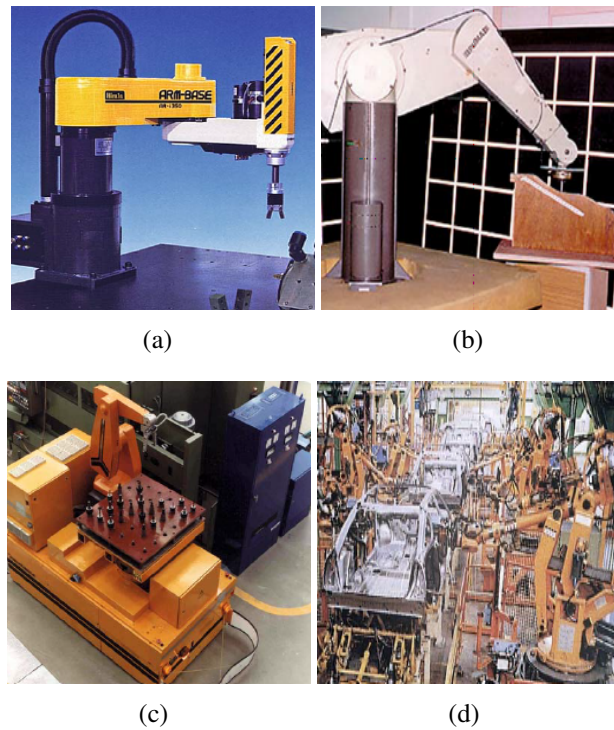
(a) A fixed-base assembly manipulator, (b) PUMA fixed-base manipulator, (c) A cleaning mobile manipulator, (d) Fixed-base welding manipulators [2]
